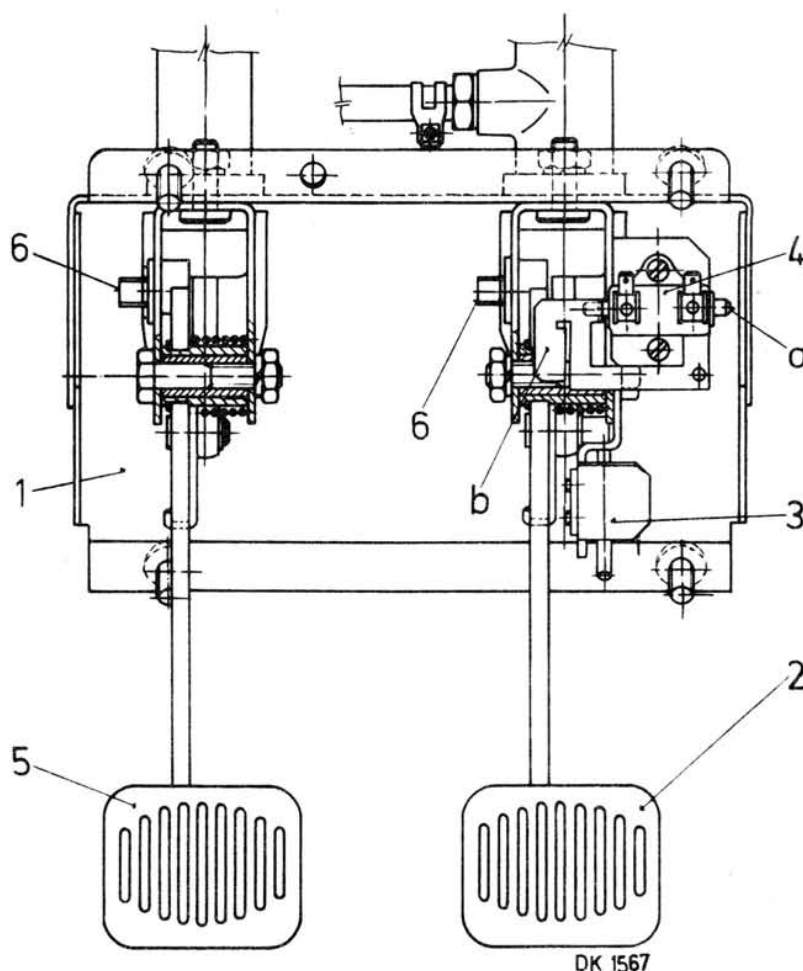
/1 - Brake and Clutch Pedal Mechanisms with the Respective Master Cylinders
